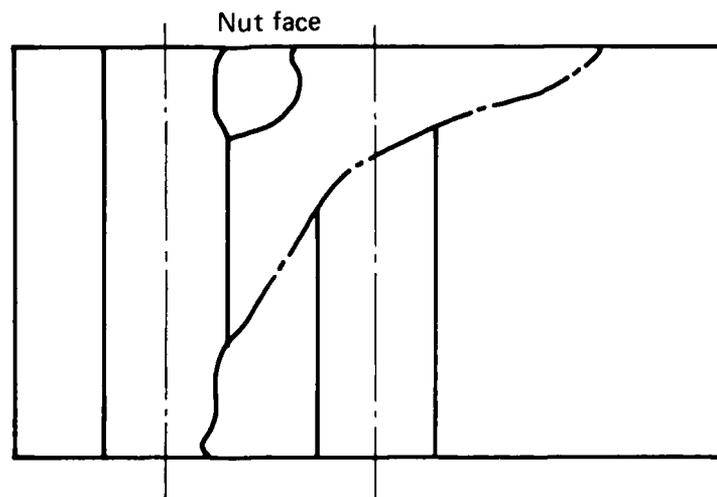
(d) FRACTURE SURFACES: SPECIMENS TYPE (D)
